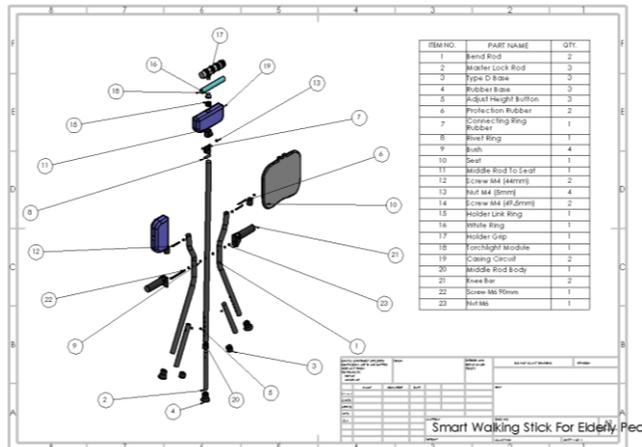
Exploded view of Smart Walking Stick for Elderly People
